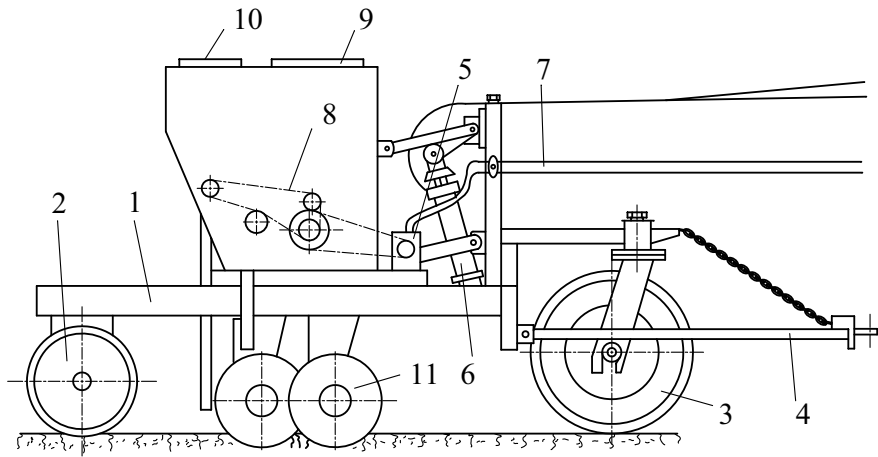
91ZB-2.0 heavy duty forage planter. 1. main frame, 2. Roller, 3. front steering wheel, 4. traction frame, 5. hydraulic motor, 6. hydraulic cylinder, 7. oil pipeline, 8. transmission system, 9. large seed tank, 10. small seed tank, 11. furrower
